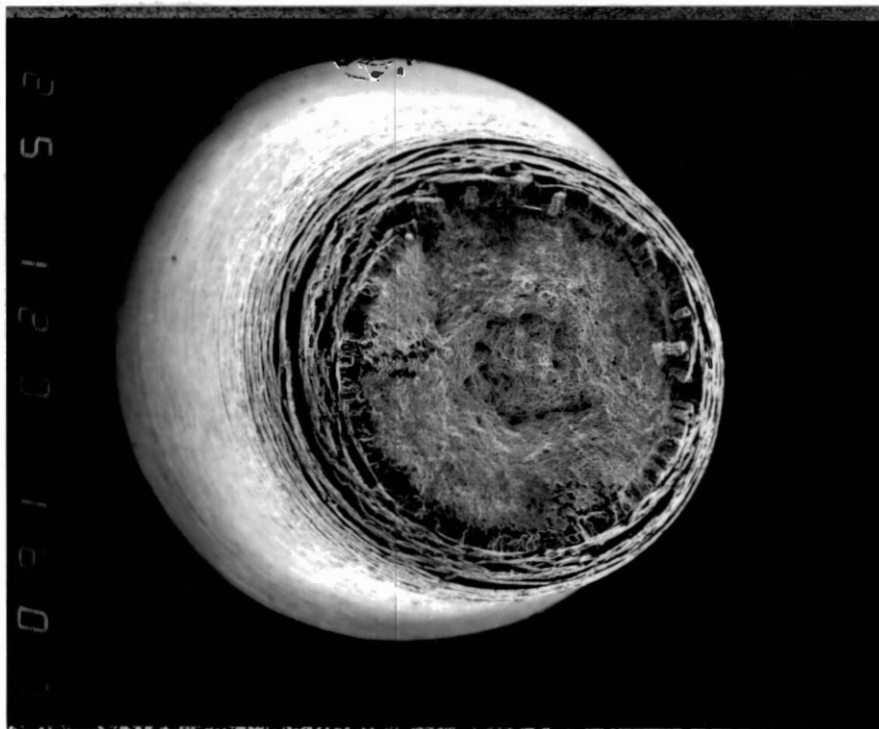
Slow rate test fracture surface showing rim of TG cracking; X 12.
